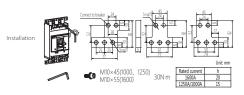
NXM-1250/ NXM-1600 connecting plate and wiring dimension
